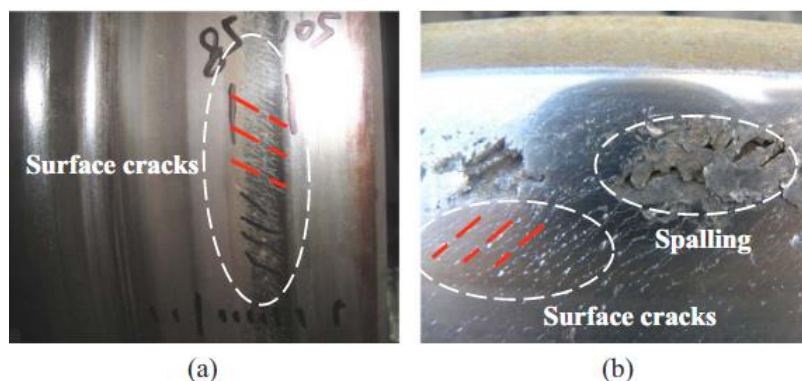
Surface fatigue cracks on the railway, (a) wheel tread; (b) rail head [150].
